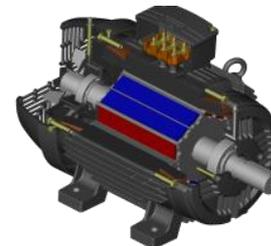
Rotor inserted PM, Courtesy of WEG ®
